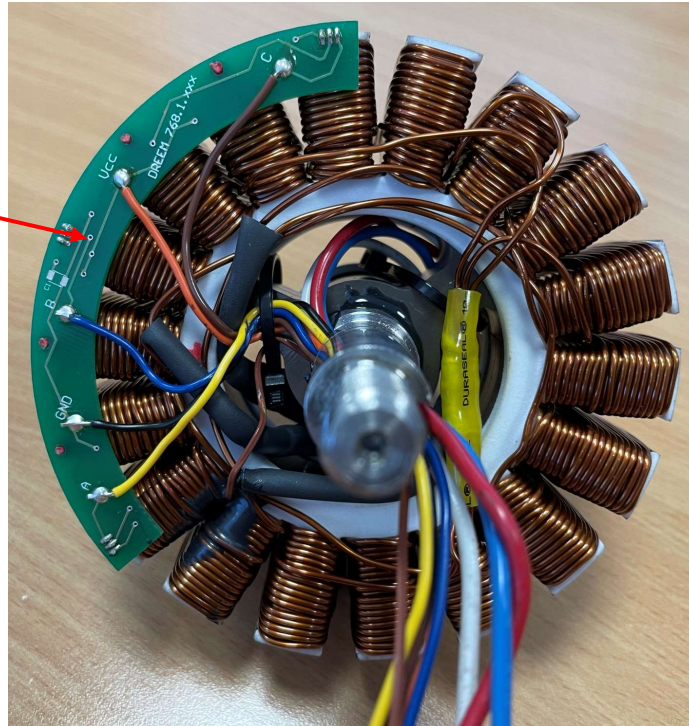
Wound stator of radial motor with Hall sensor PCB.
